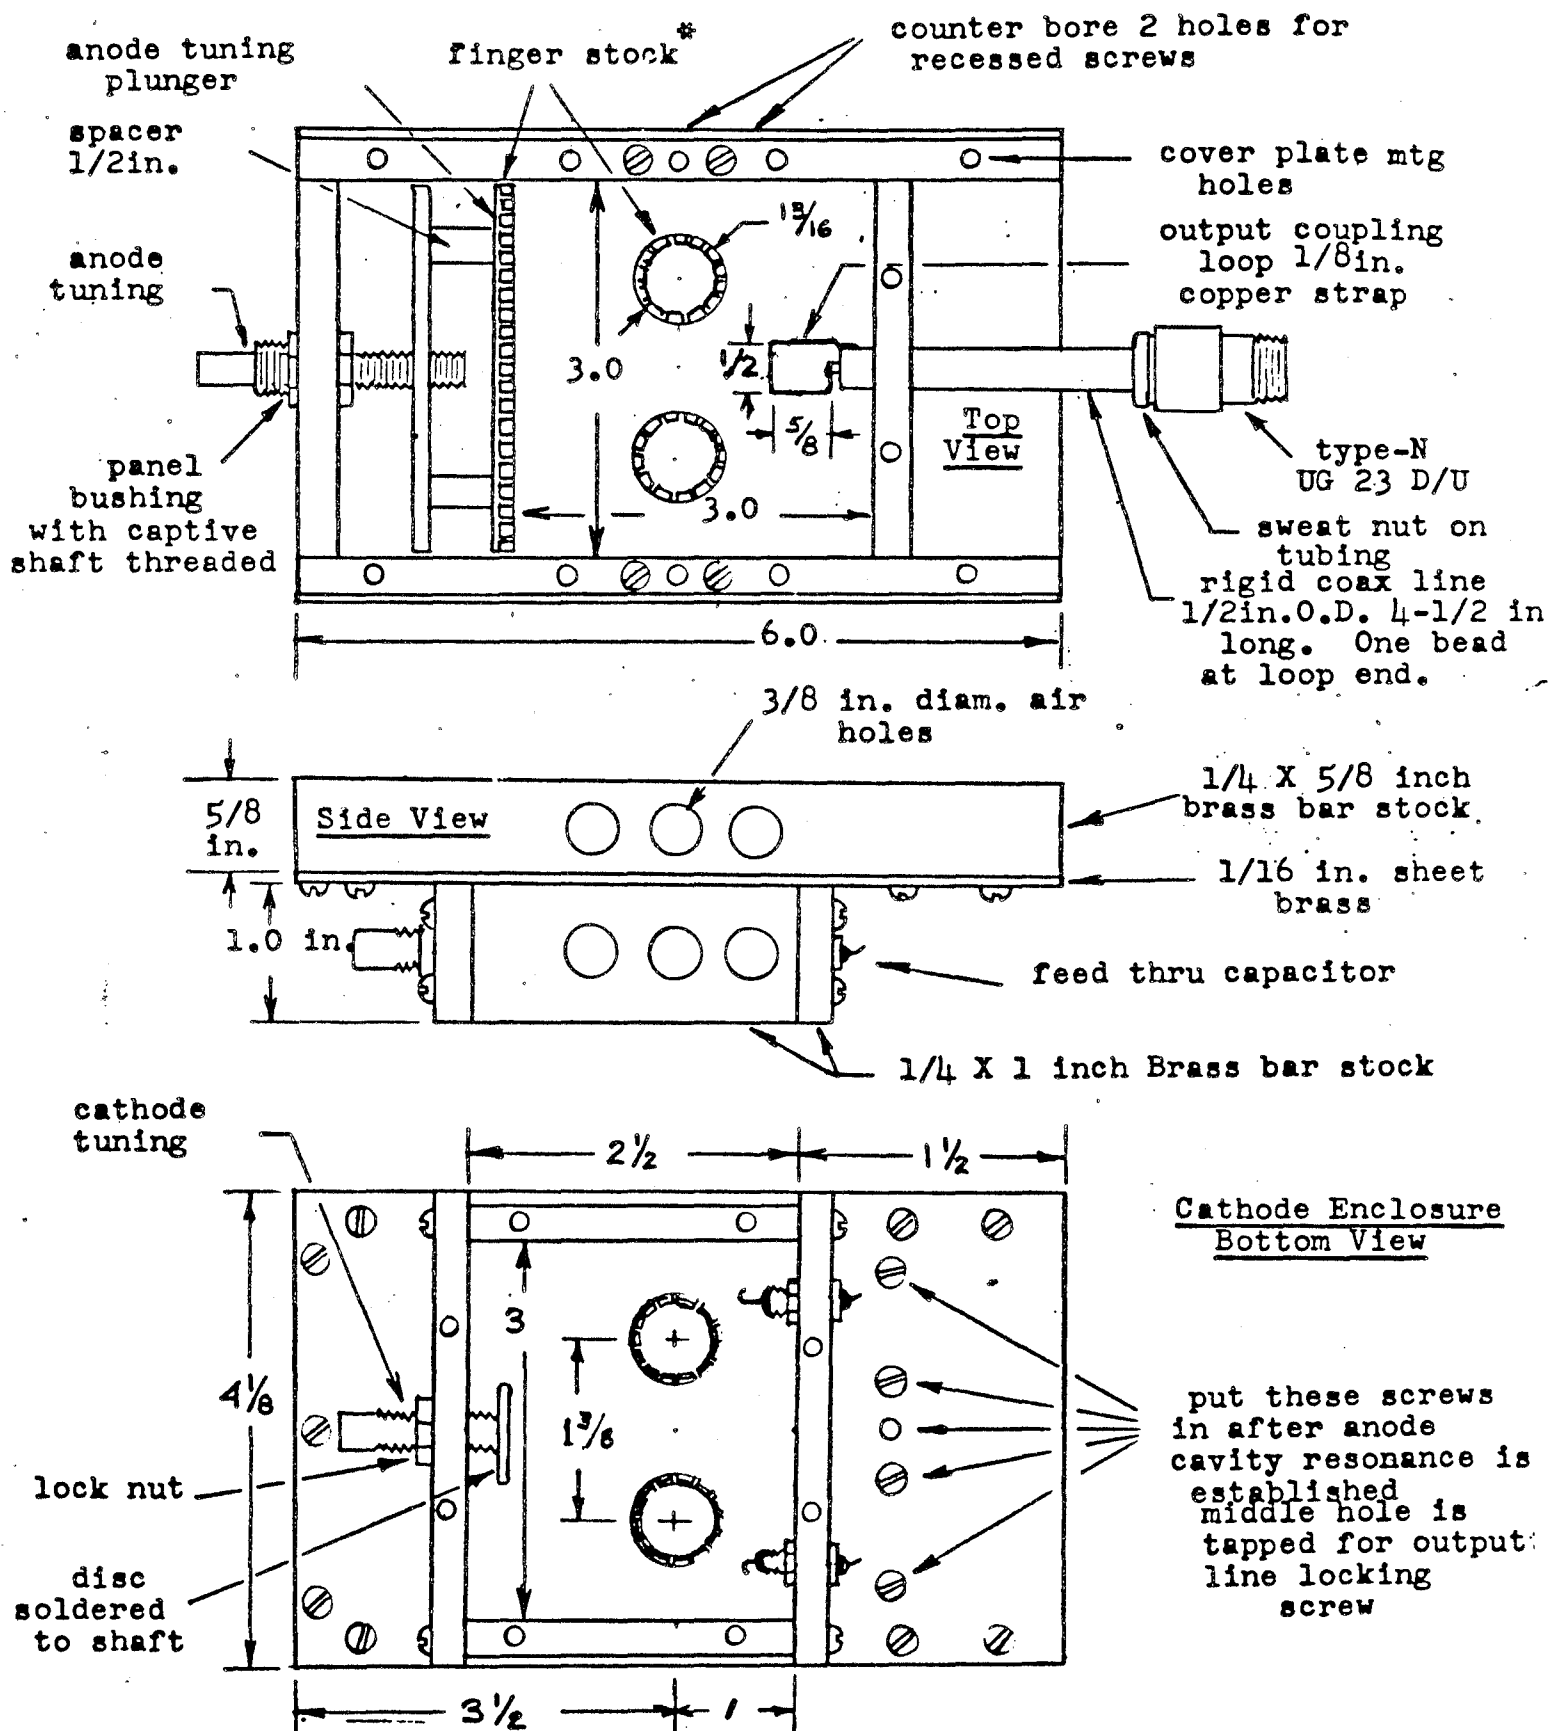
\* Detailed views of amplifier without top and bottom cover plates. All dimensions are in inches.
